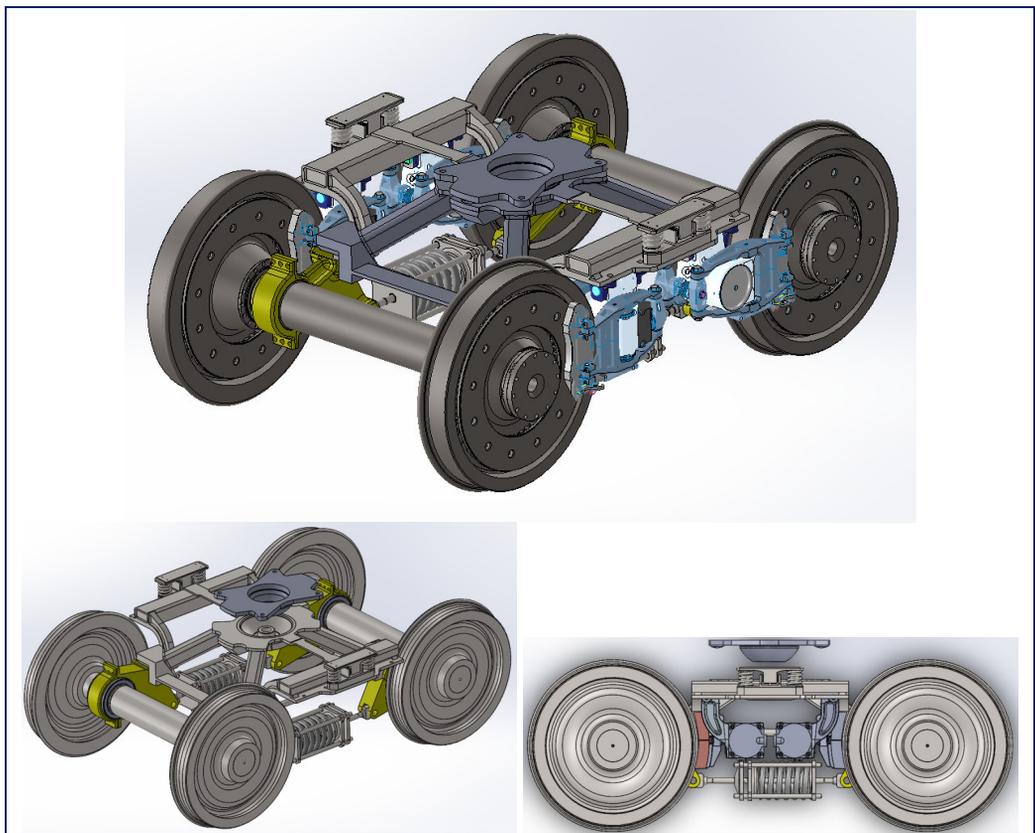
Top: the 4L bogie with web-mounted brake discs and AIR Wheelsets (mass \cong 4100 kg). Bottom: the 4L bogie with compact brake units acting on thermostable wheels and conventional inboard bearings wheelsets (mass \cong 3700 kg).
